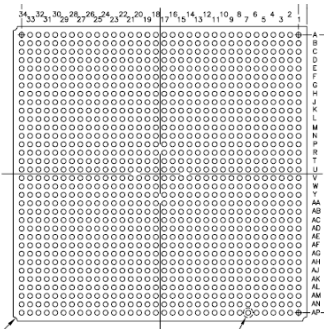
Bottom View of a XILINX FG1156 – Package Size is 35 x 35 mm with a 34 x 34 Array of Solder Balls of Nominal Diameter of 0.6 mm and a Pitch of 1.0mm[1].
